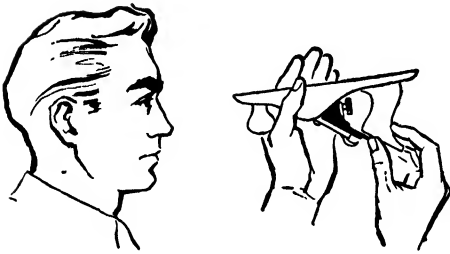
To make a trial adjustment, turn the plane upside down and sight along the bottom. The blade should project through evenly and just about the thickness of a sheet of paper
